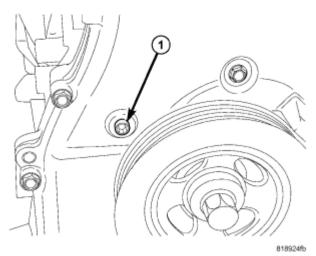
TENSIONER ACCESS PLUG Courtesy of CHRYSLER LLC
